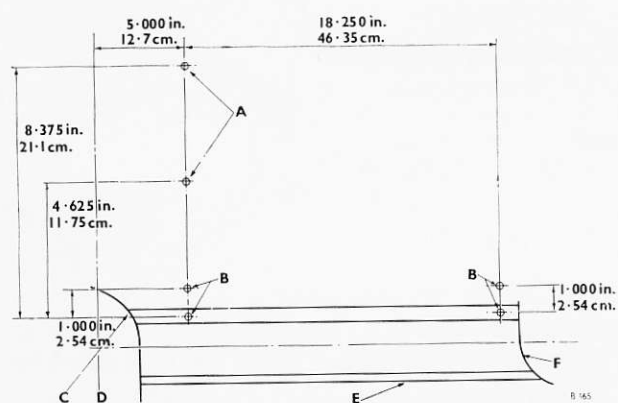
Dimensions for drilling holes for rear seat 'U' bolts and stiffening brackets —
